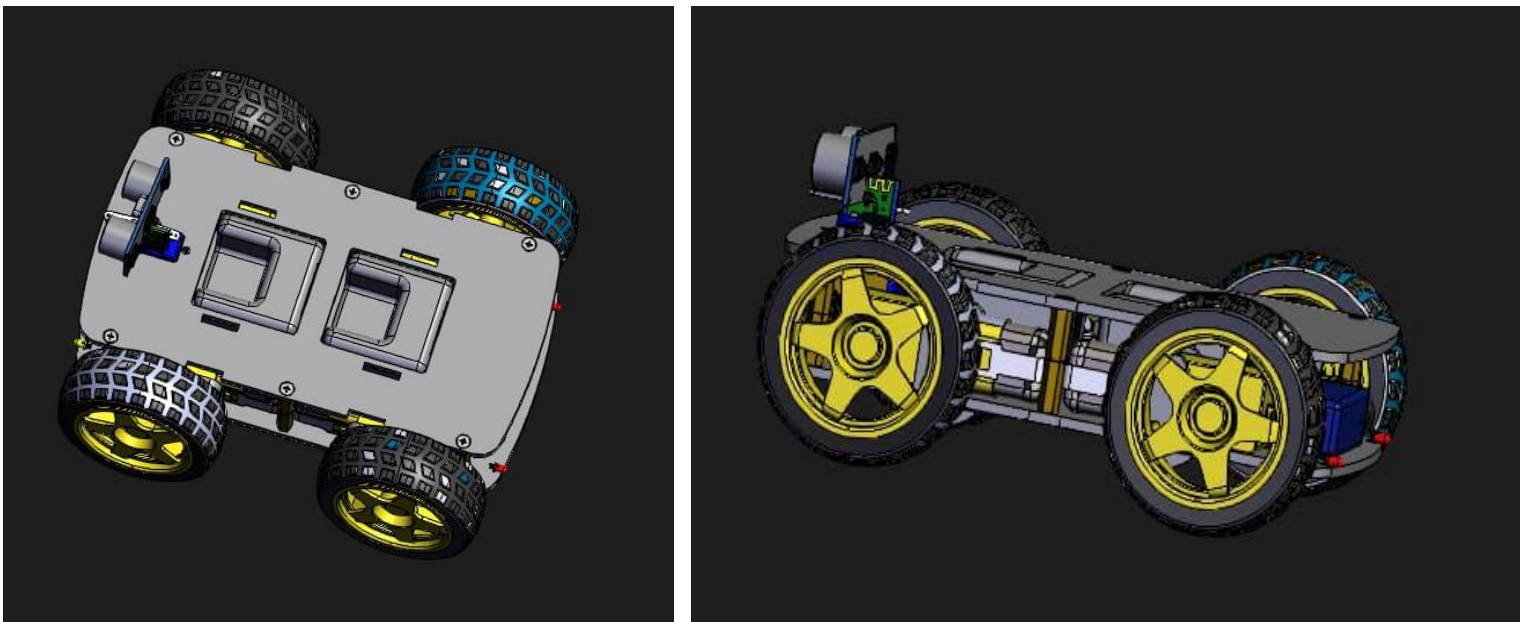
Solidworks design of the 4 wheel chassis used for the project
